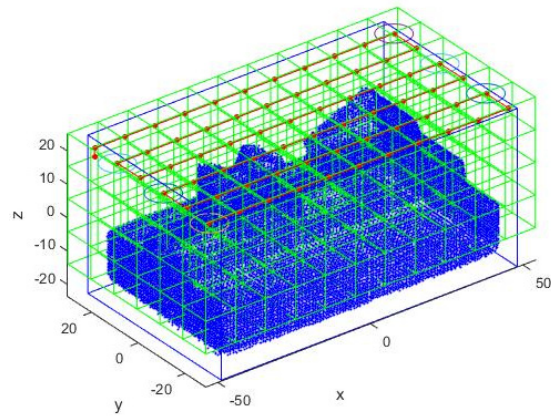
Grid System for Rough Cutting by Using Flat-End Mill
